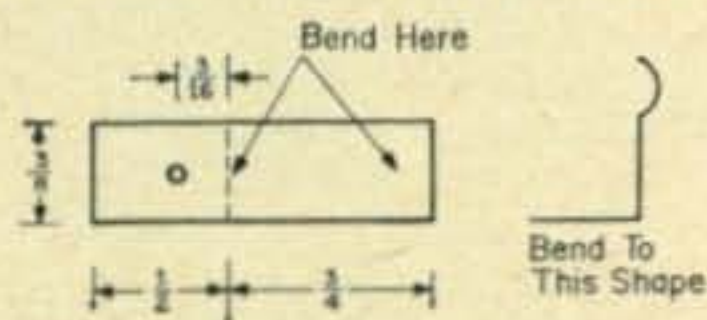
Details for forming the tube base grounding clips. Four are required.
